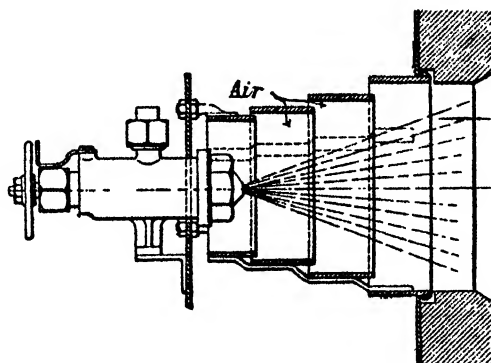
Arrangement of Thornycroft pressure-jet burner and air regulator.
